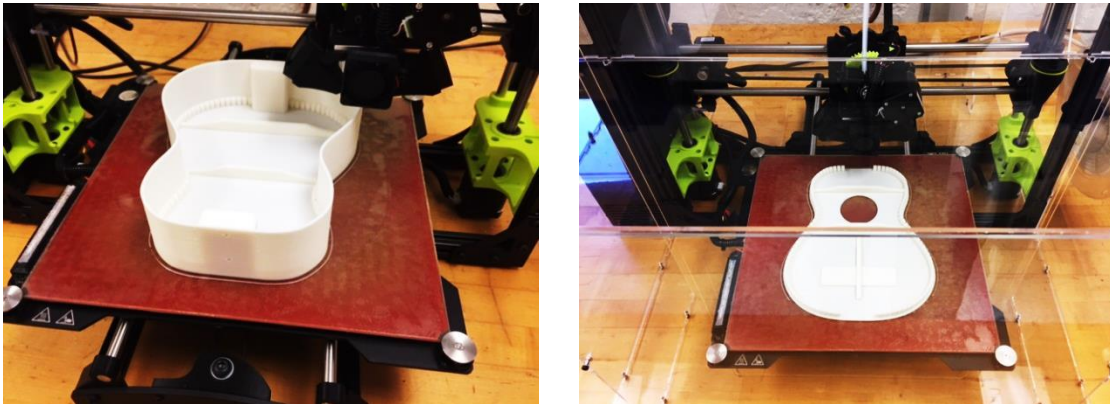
3D Printing Back (left) and Front (right) Pieces of Acoustic Chambers
